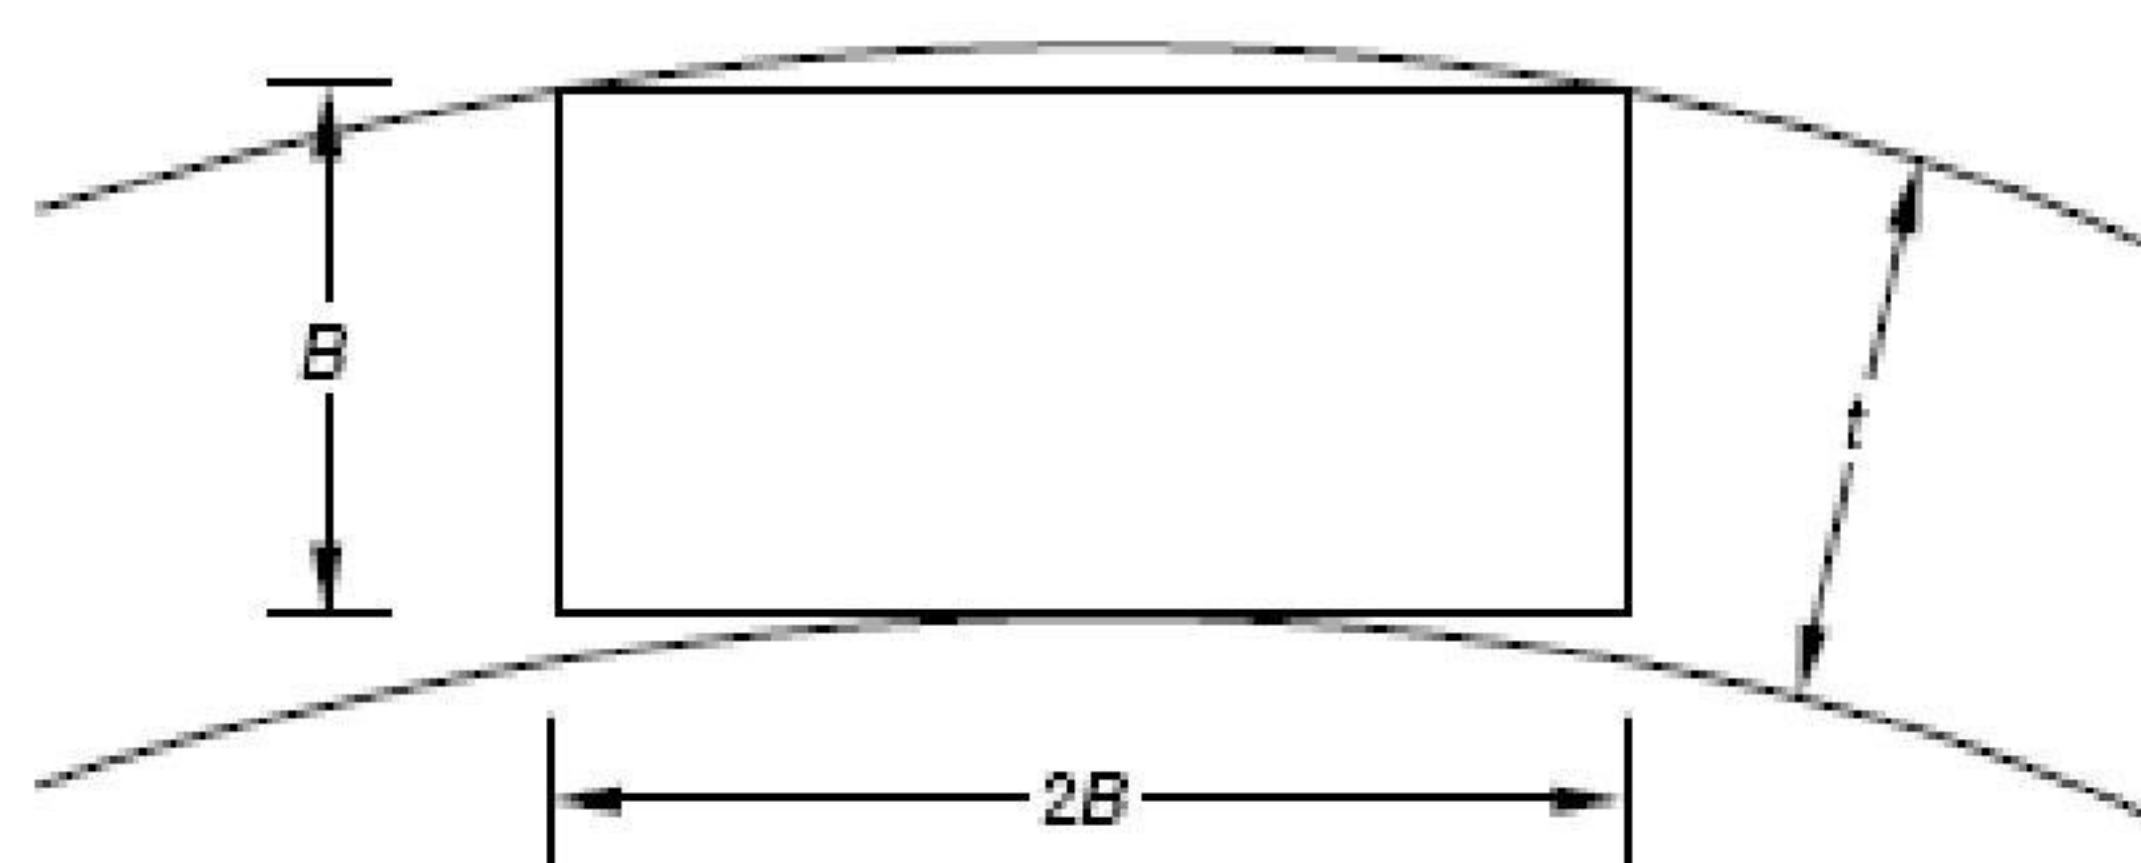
Machining Objective for CTOD Test Specimen with Respect to Pipe Wall
